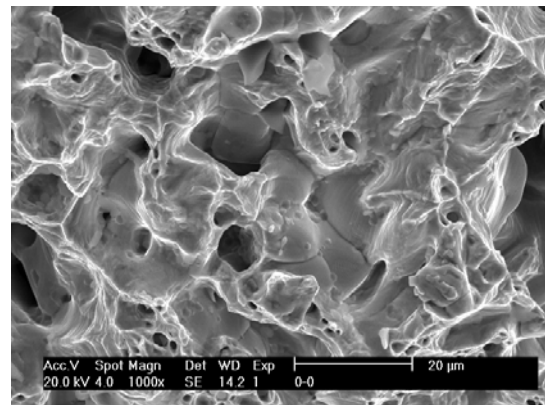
Fracture surface of sintered SS 316L tensile specimen
